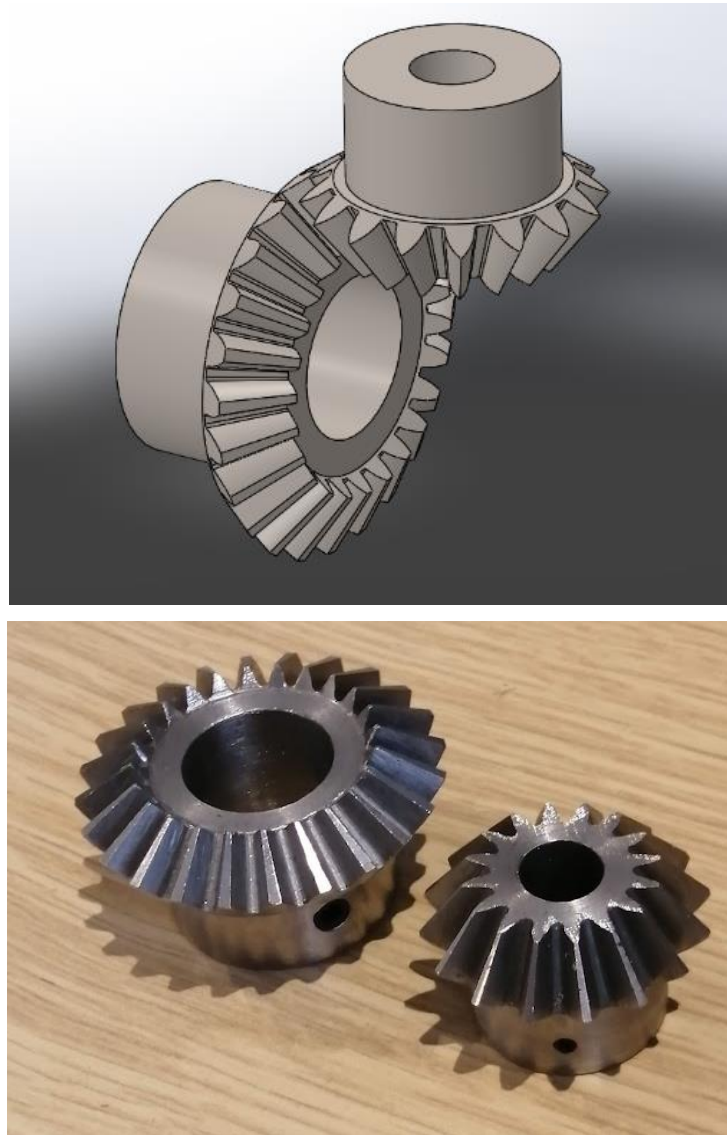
a) Steel bevel gear pair in Solidworks (top), Purchased bevel gears (bottom)
